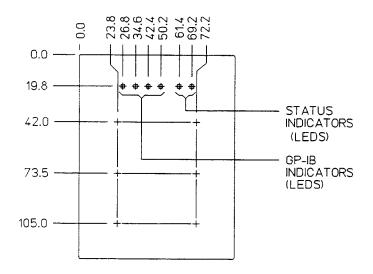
MODULE FRONT 6 COMPONENT GRIDWORK, 2 SLOT MODULE
